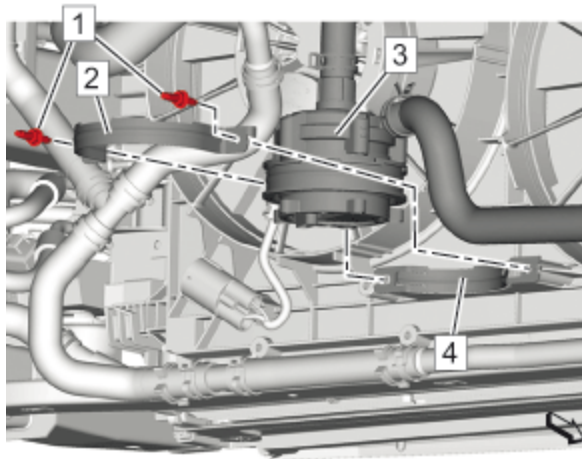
Drive Motor Battery Coolant Pump Bracket Studs
